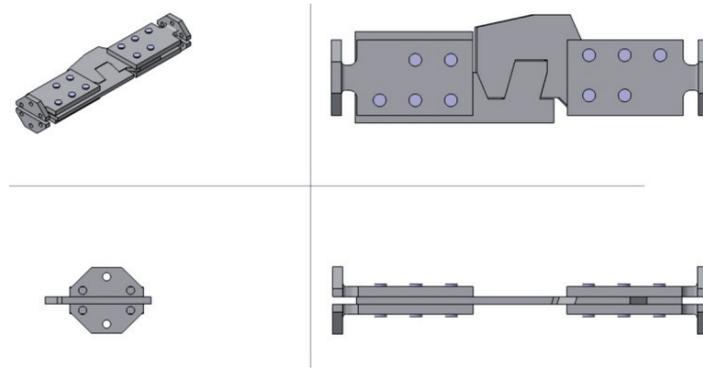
3D view of the tested system of the side locks along with the mounting elements in the strength machine
